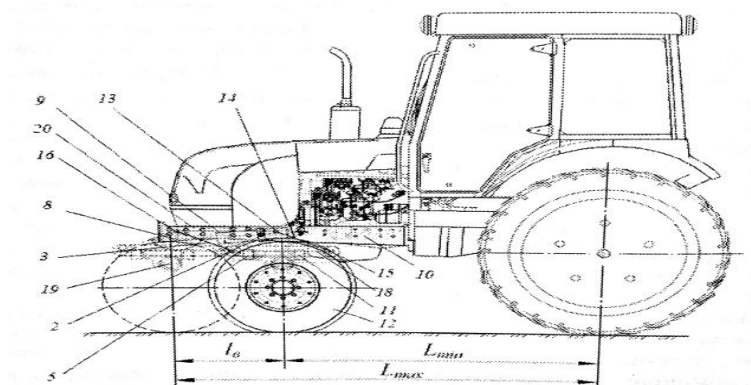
Scheme for modifying the tractor's wheelbase using a pendulum-type front axle.
